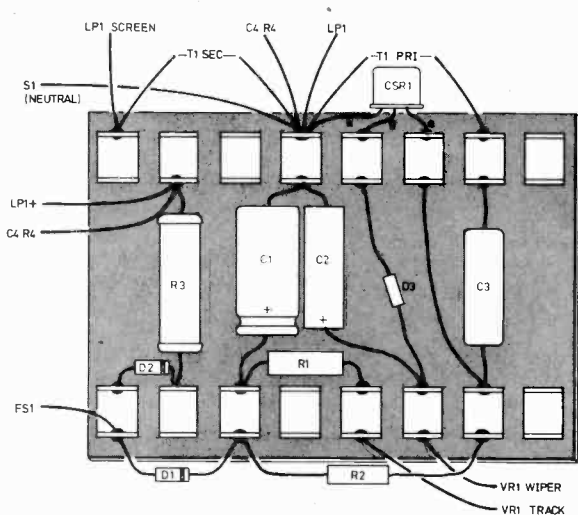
Component wiring and assembly on group board. Stand-off spacers should be used when connecting to case.
